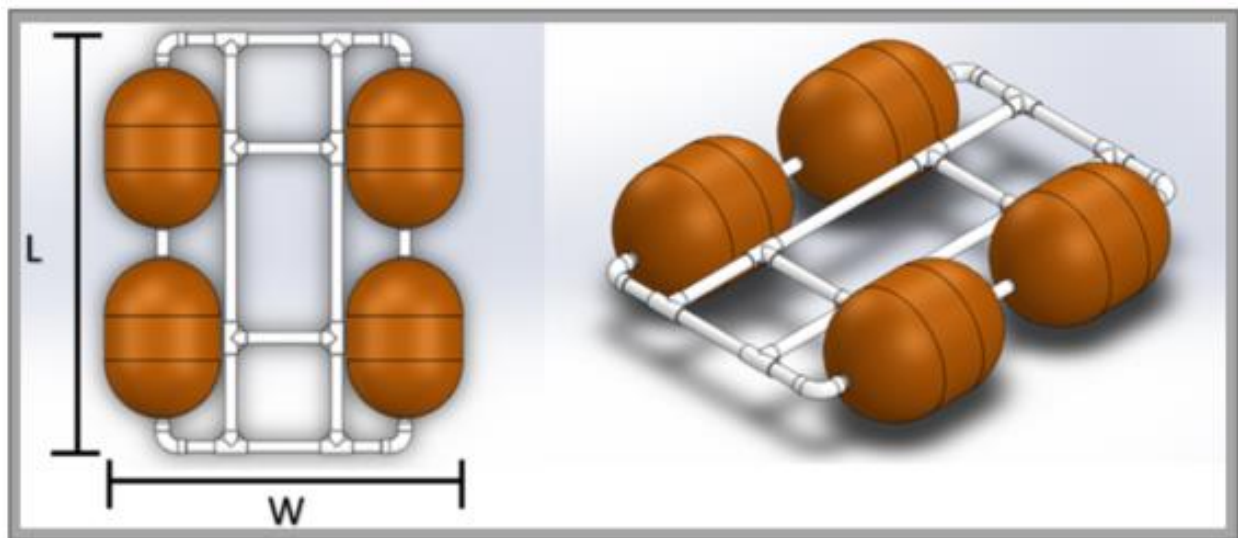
Top & Isometric View of B1318BO Frame Assembly
